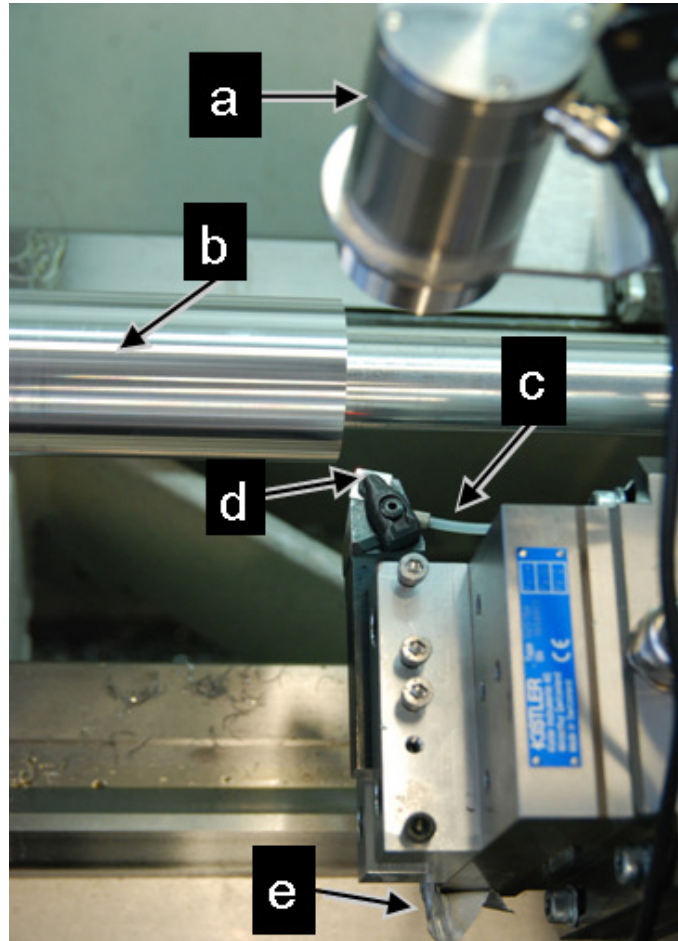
Experimental set-up of the internally-cooled tool on the CNC lathe: (a) pyrometer, (b) work-piece, (c) coolant outlet, (d) cutting tool, (e) coolant inlet.
